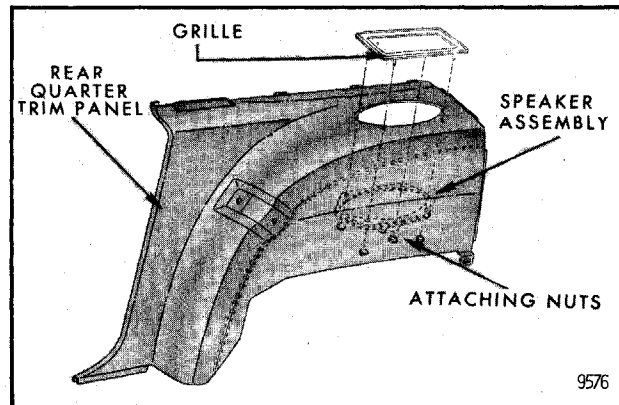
Rear Speaker Installation - "A-35" Styles
